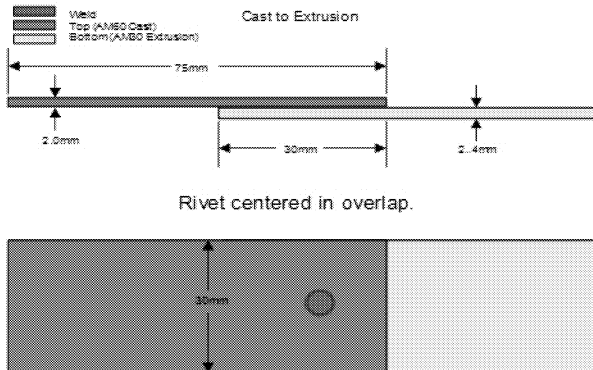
Geometries and dimensions of SPR and SPR with adhesive joint for magnesium alloys [12].
